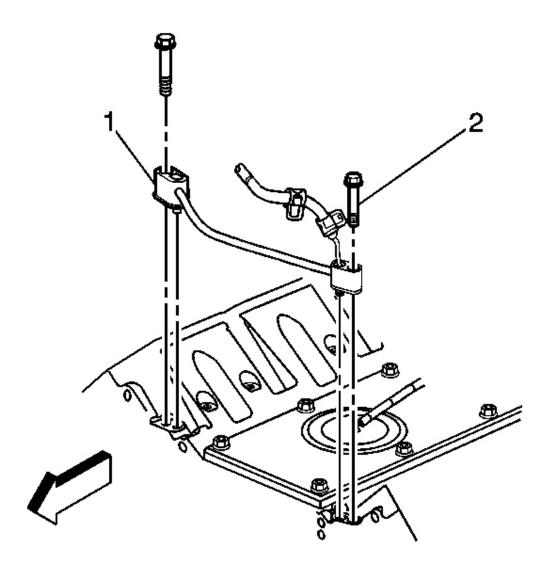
View Of Coolant Air Bleed Pipe & Bolts Courtesy of GENERAL MOTORS CORP.
